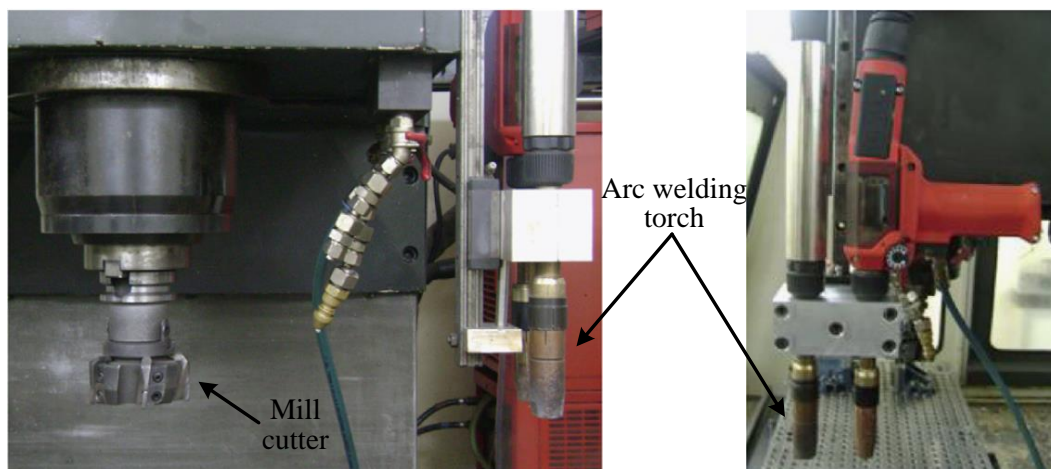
The milling head and the welding torches: (left) front view; (right) side view adapted from Karunakaran *et al.* (2010)
